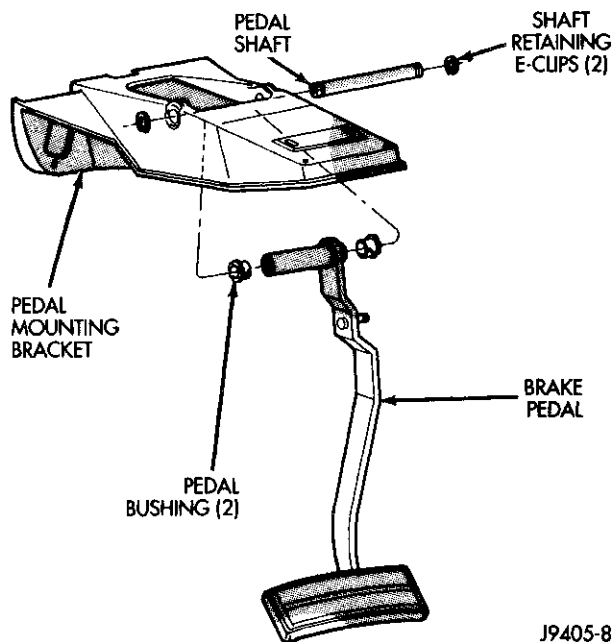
Brake Pedal Mounting (With Automatic Transmission)
